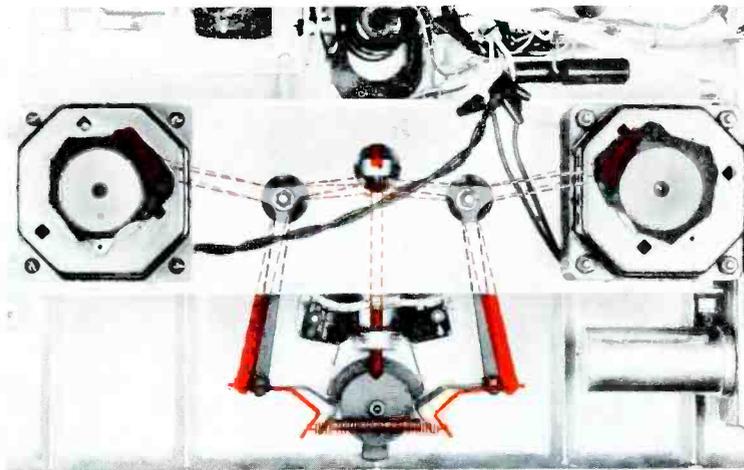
B. Parts Which Move When Tape Drive Control Is Moved to Record or Playback Position. Positions Before Moving Are Shown in Black and After Moving Are in Red.
